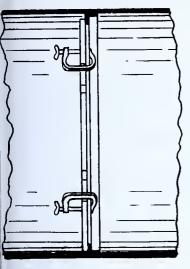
Tray Clamped to Angle Ring with C Clamps
